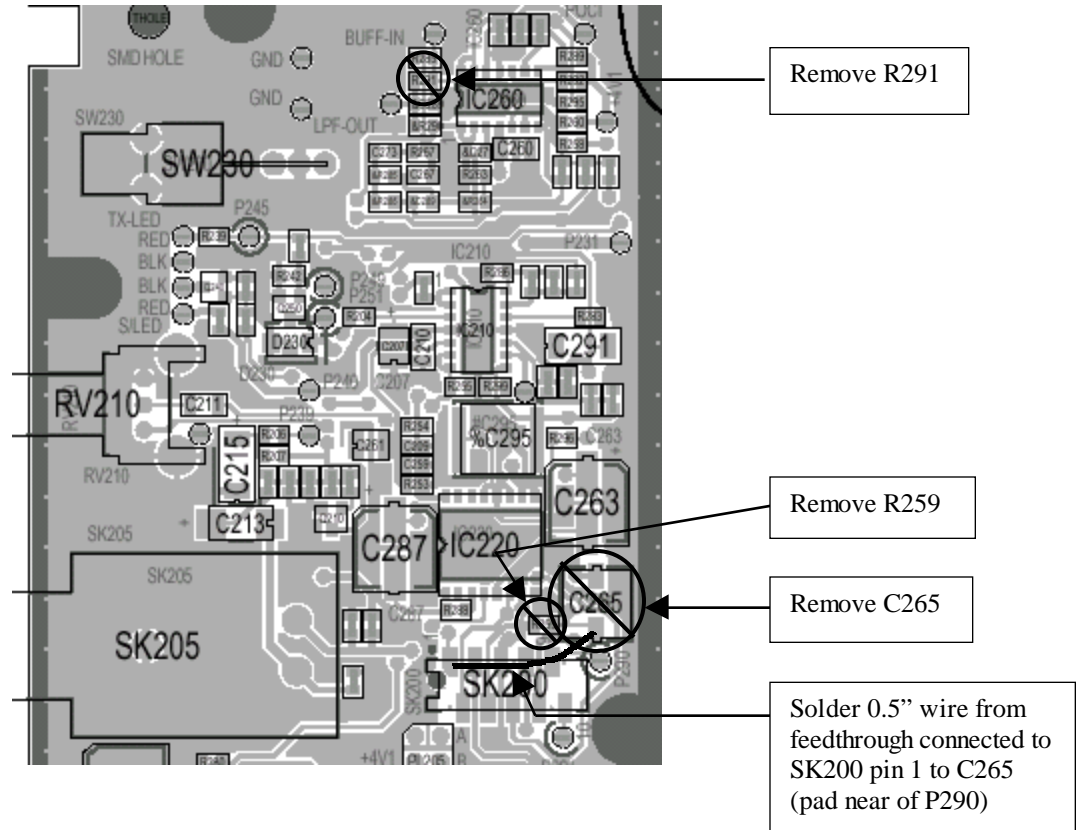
T857 Exciter PCB (rev 220-01398-04), Top Side 1/2
